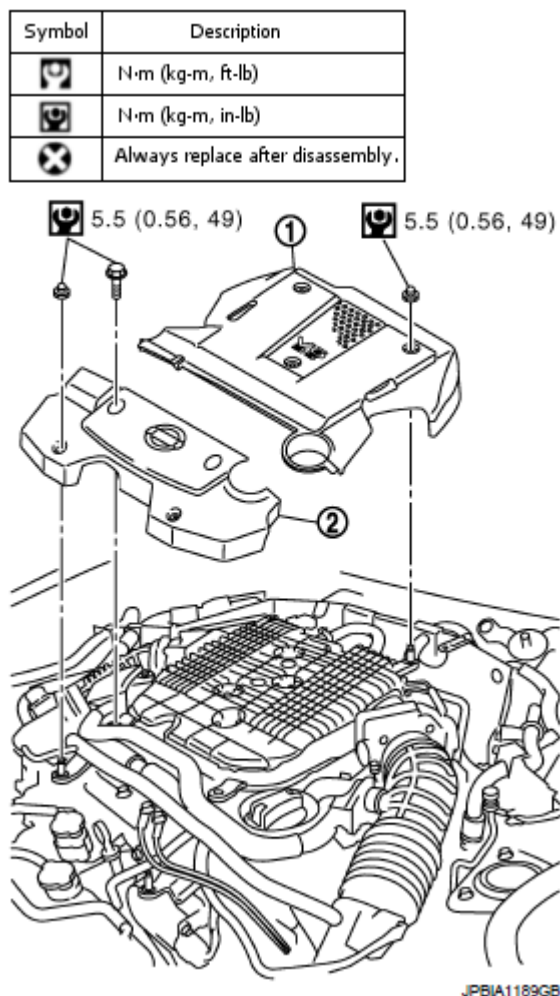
Identifying Engine Cover And With Power Tool With Torque Specifications
